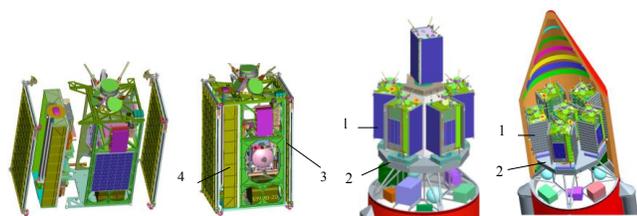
SSV with Parallel Core and Auxiliary Equipment Modules Installed on the Adapter End 1 – SSV; 2 – adapter; 3,4 – core and auxiliary equipment modules.
